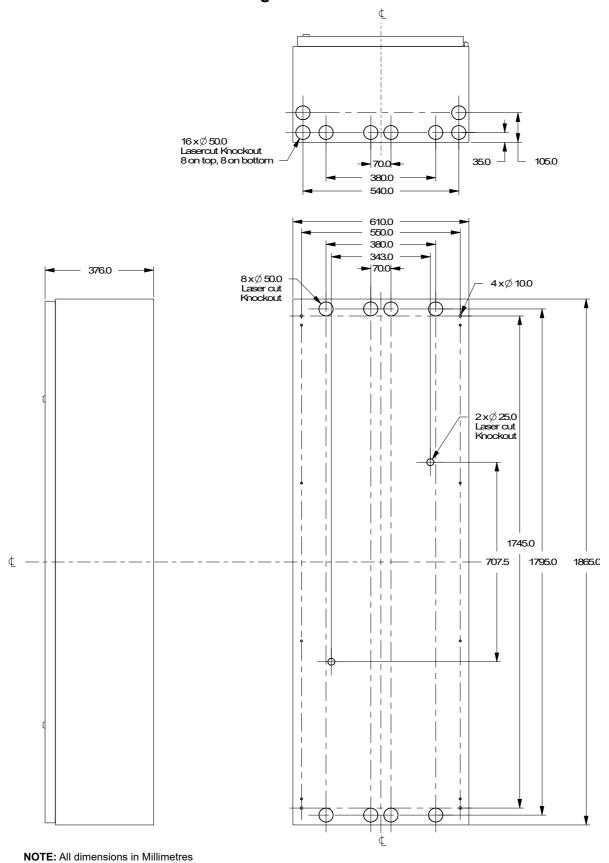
CAB 40U Cabinet Mounting Details and Dimensions
